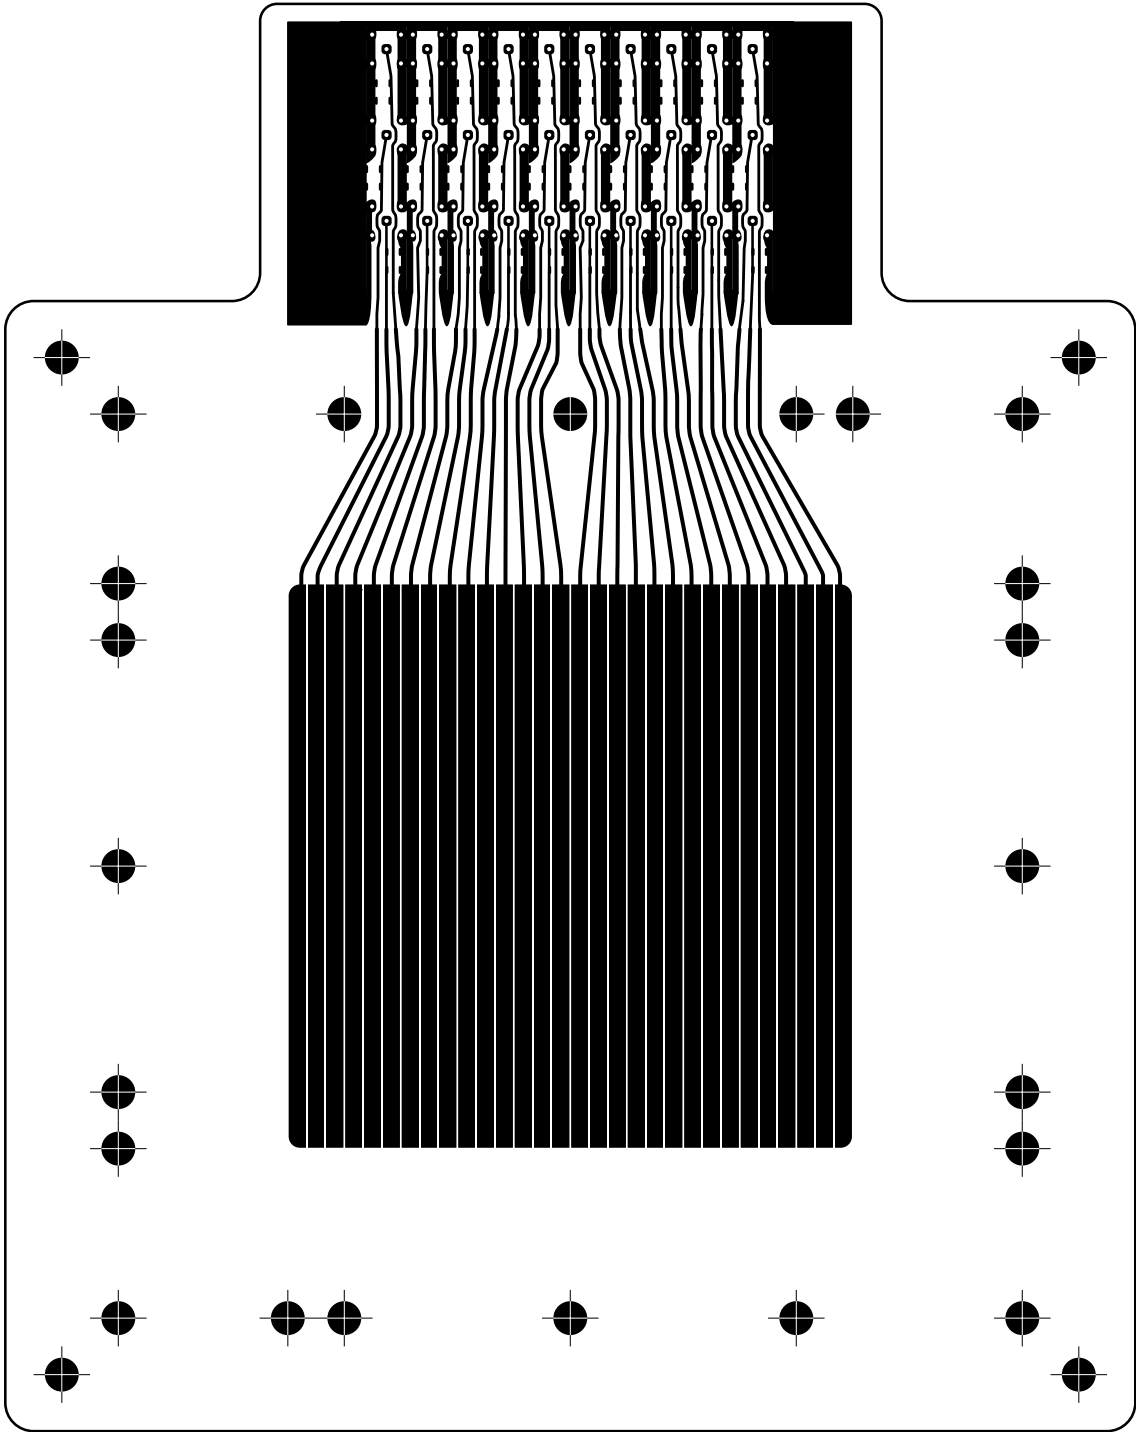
Etching film for the pad plane. Drawing by N. Heine.
